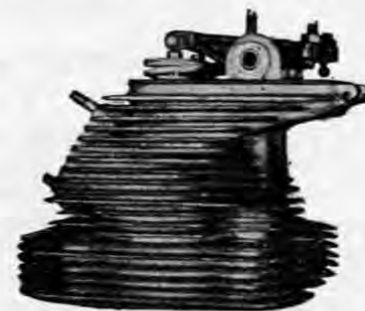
Cylinder head of the Walter Minor aircraft engine. Note the thick fin for transmitting forces from the rocker arm to the cylinder head.
